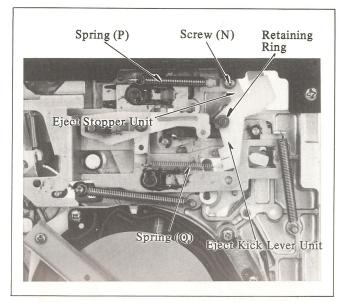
Assembly and Adjustment of Gears and Rods-(10)
